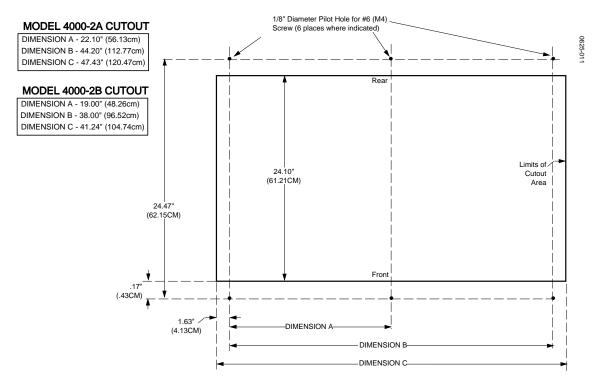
Model 4000-2A/B Cutout Dimension Detail
